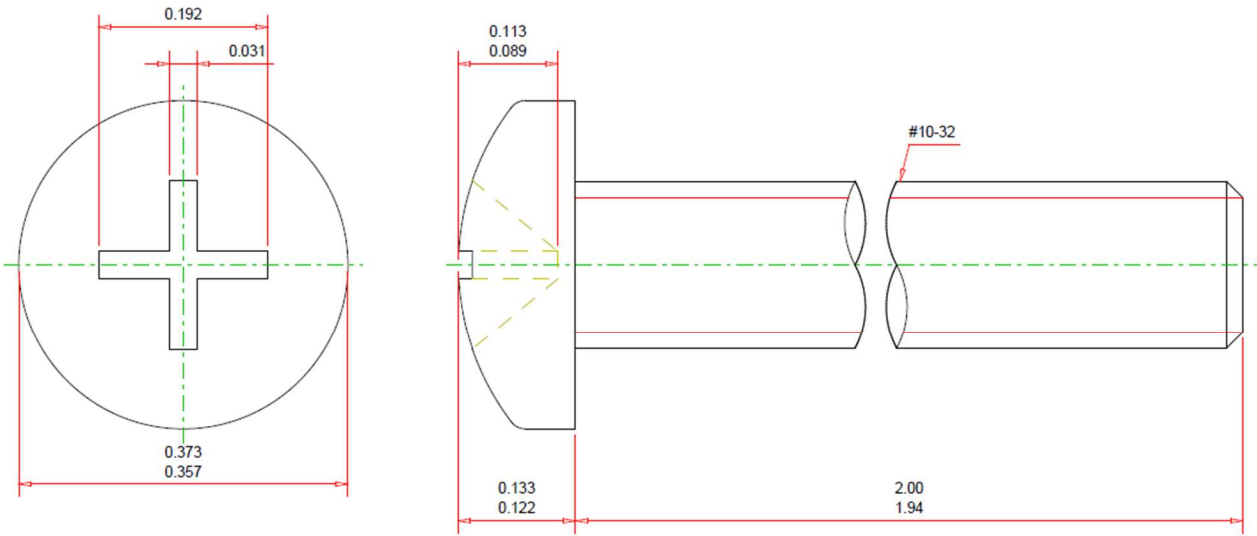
Part 50-0015 Drawing – 10-32 Screw Length 2”
